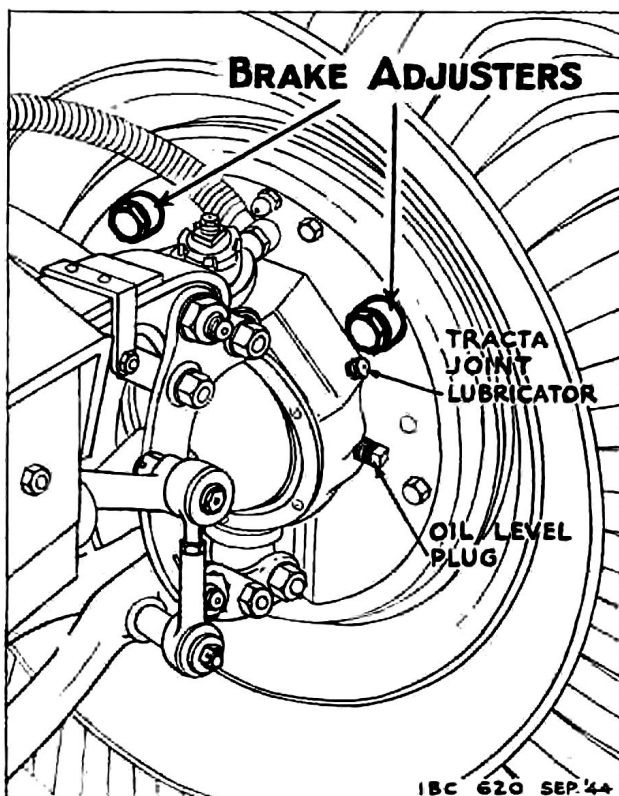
BRAKE ADJUSTMENT (FRONT).
